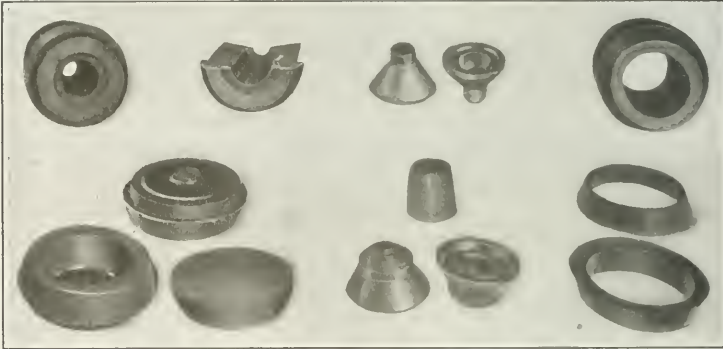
Examples of Die-pressed Castings for Fuse Parts and Similar Pieces—note High Quality of Finish that is obtained
